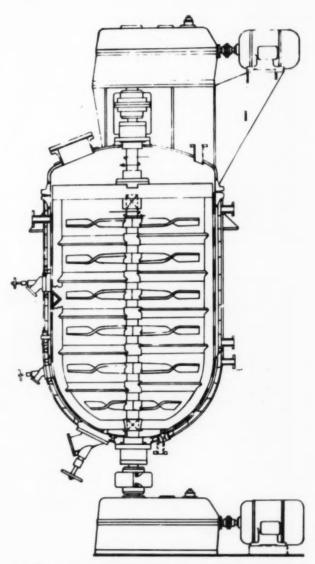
Design of two motor drive. (Courtesy of Struthers Wells Corp.)
